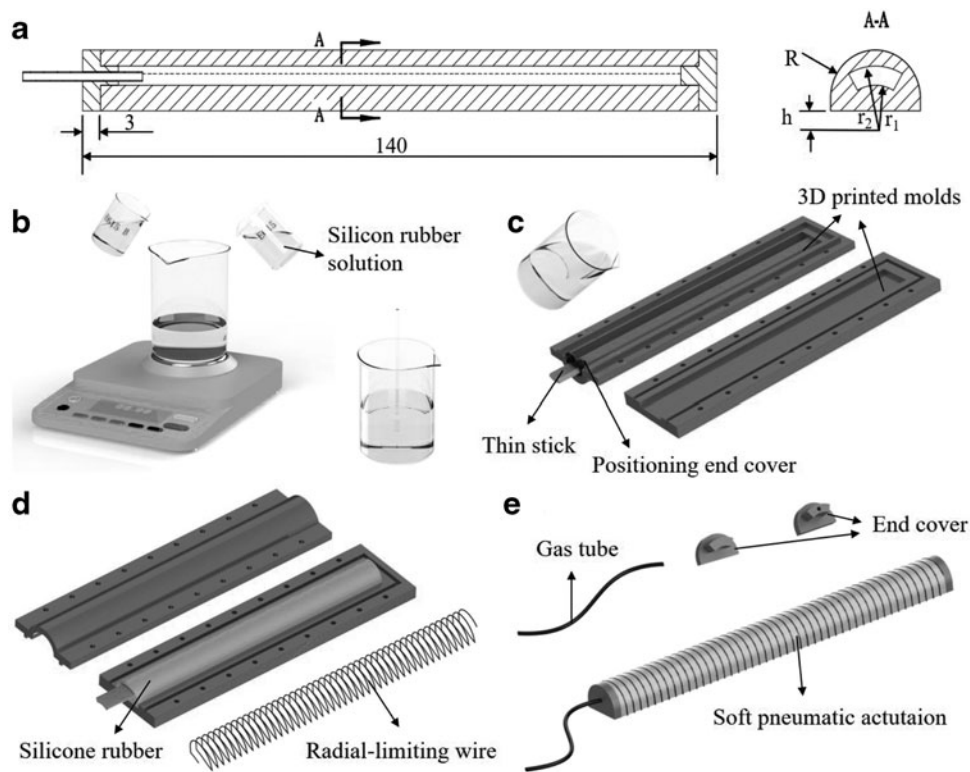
Soft pneumatic actuators. (a) Design and geometric parameters of pneumatic actuation. (b) Mixing of silicone rubber solution. (c) Pouring the silicone rubber solution into the molds. (d) Curing and demolding of silicone rubber body. (e) Assembly of pneumatic actuator.
